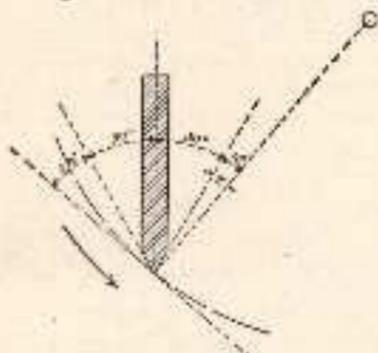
Cutting angle of double bevel high-speed steel machine knife.
